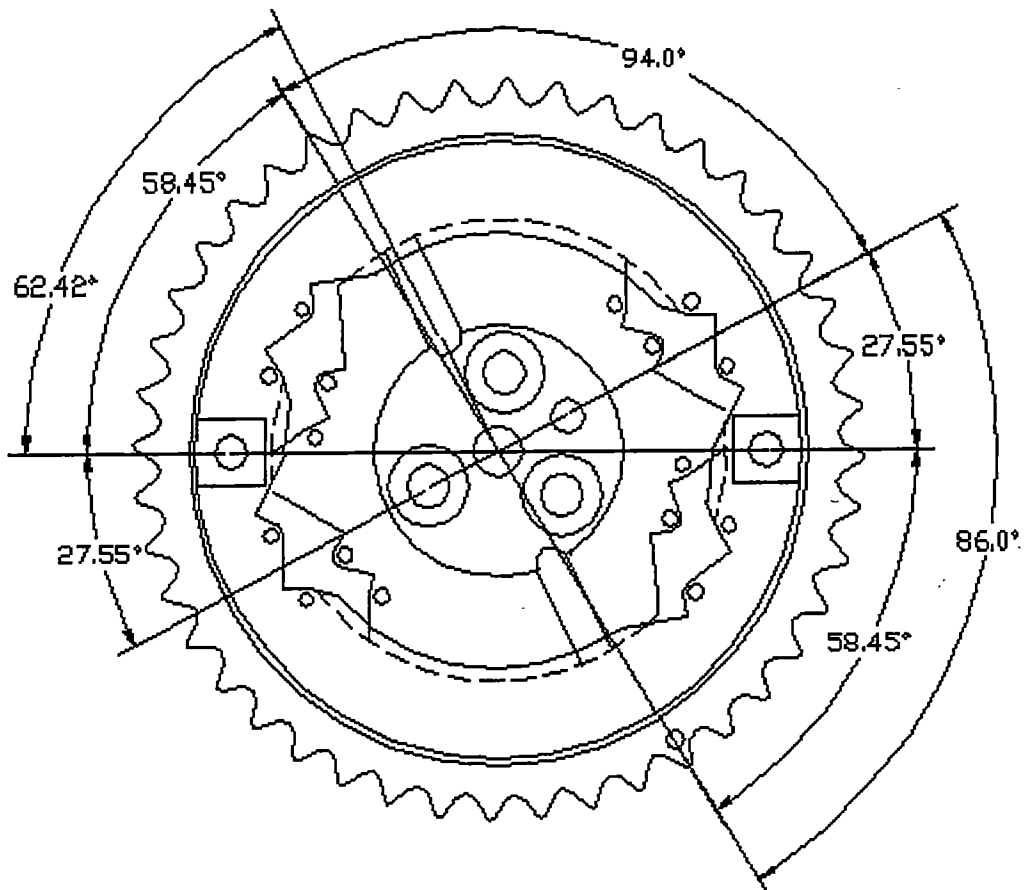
Alignment Angles of the Two Sprocket Components and the Cam Extension
